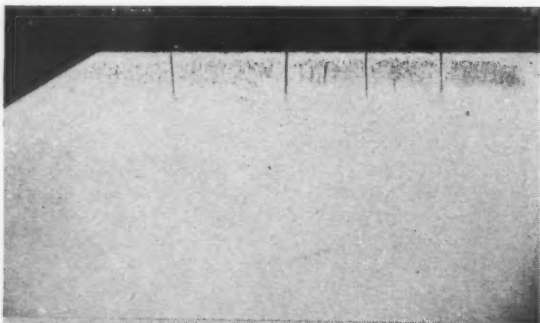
Thermal cracks from the cutting edge on rake face of carbide tool (X12).
